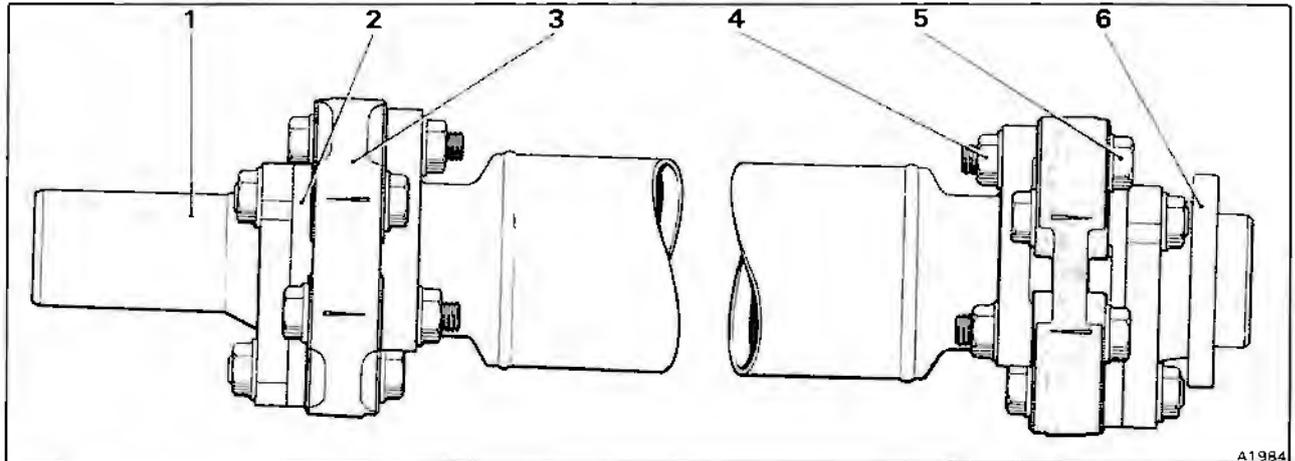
Propeller shaft/rubber flexible couplings – Gearbox and final drive
